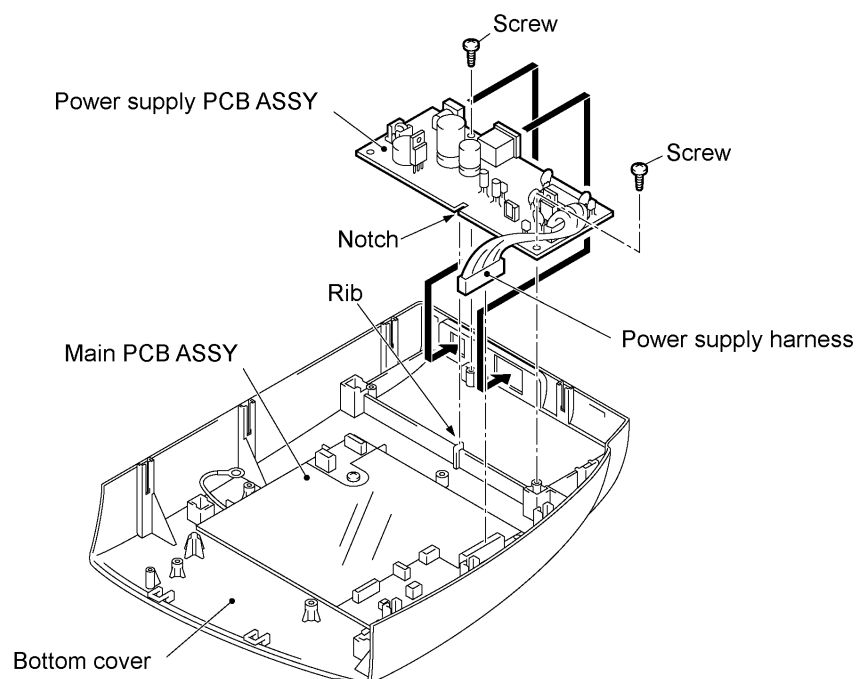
Installing the Power Supply PCB ASSY
